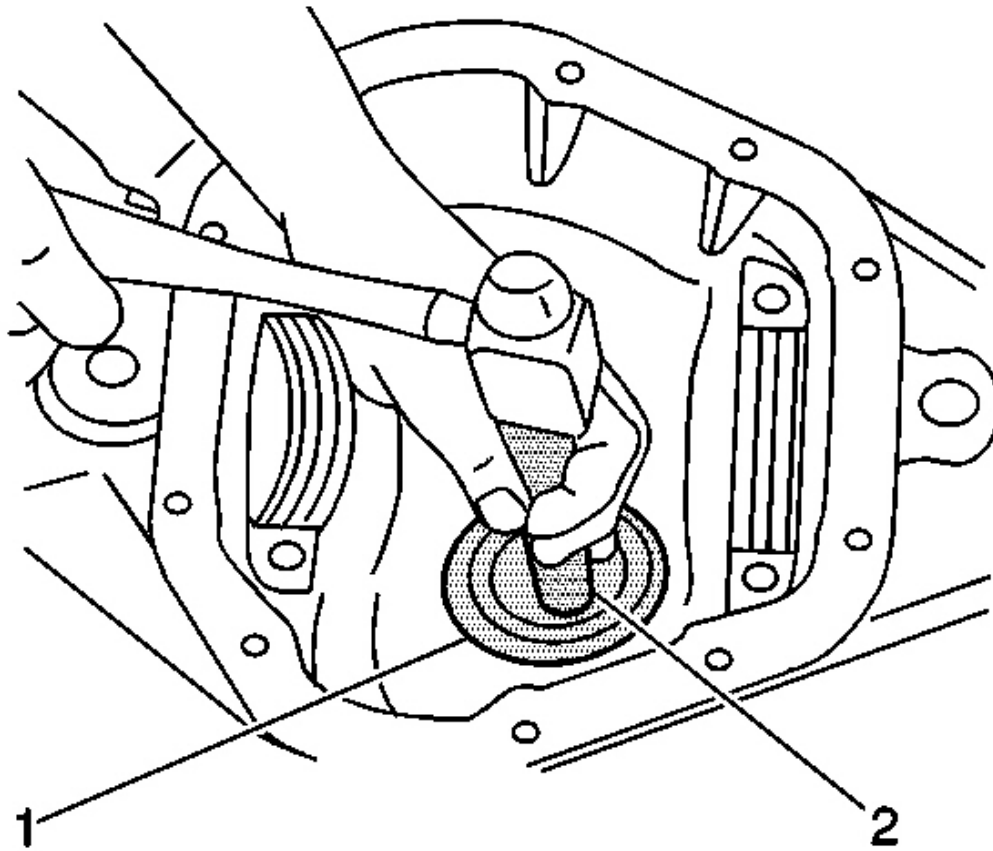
Installing Inner Pinion Bearing Cup Using J 45900, J 22306, J 44417 & J 8092
